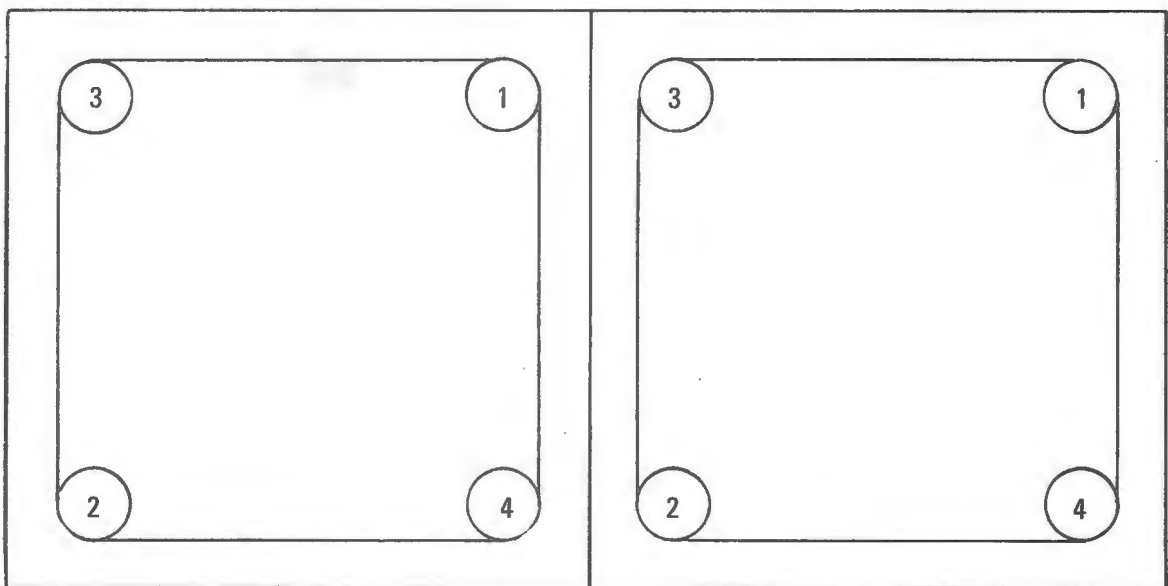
CYLINDER NUT TORQUING SEQUENCE
